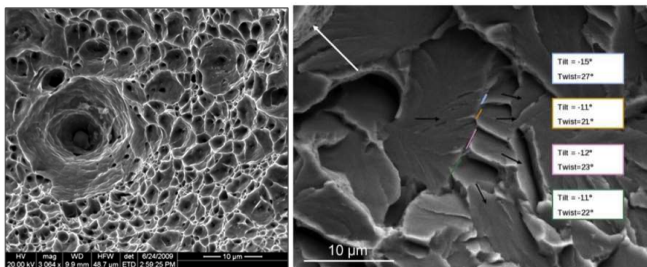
Left: Ductile fracture of steel, Right: Brittle fracture of steel (Pineau, Benzerga, & Pardoën, 2016)
